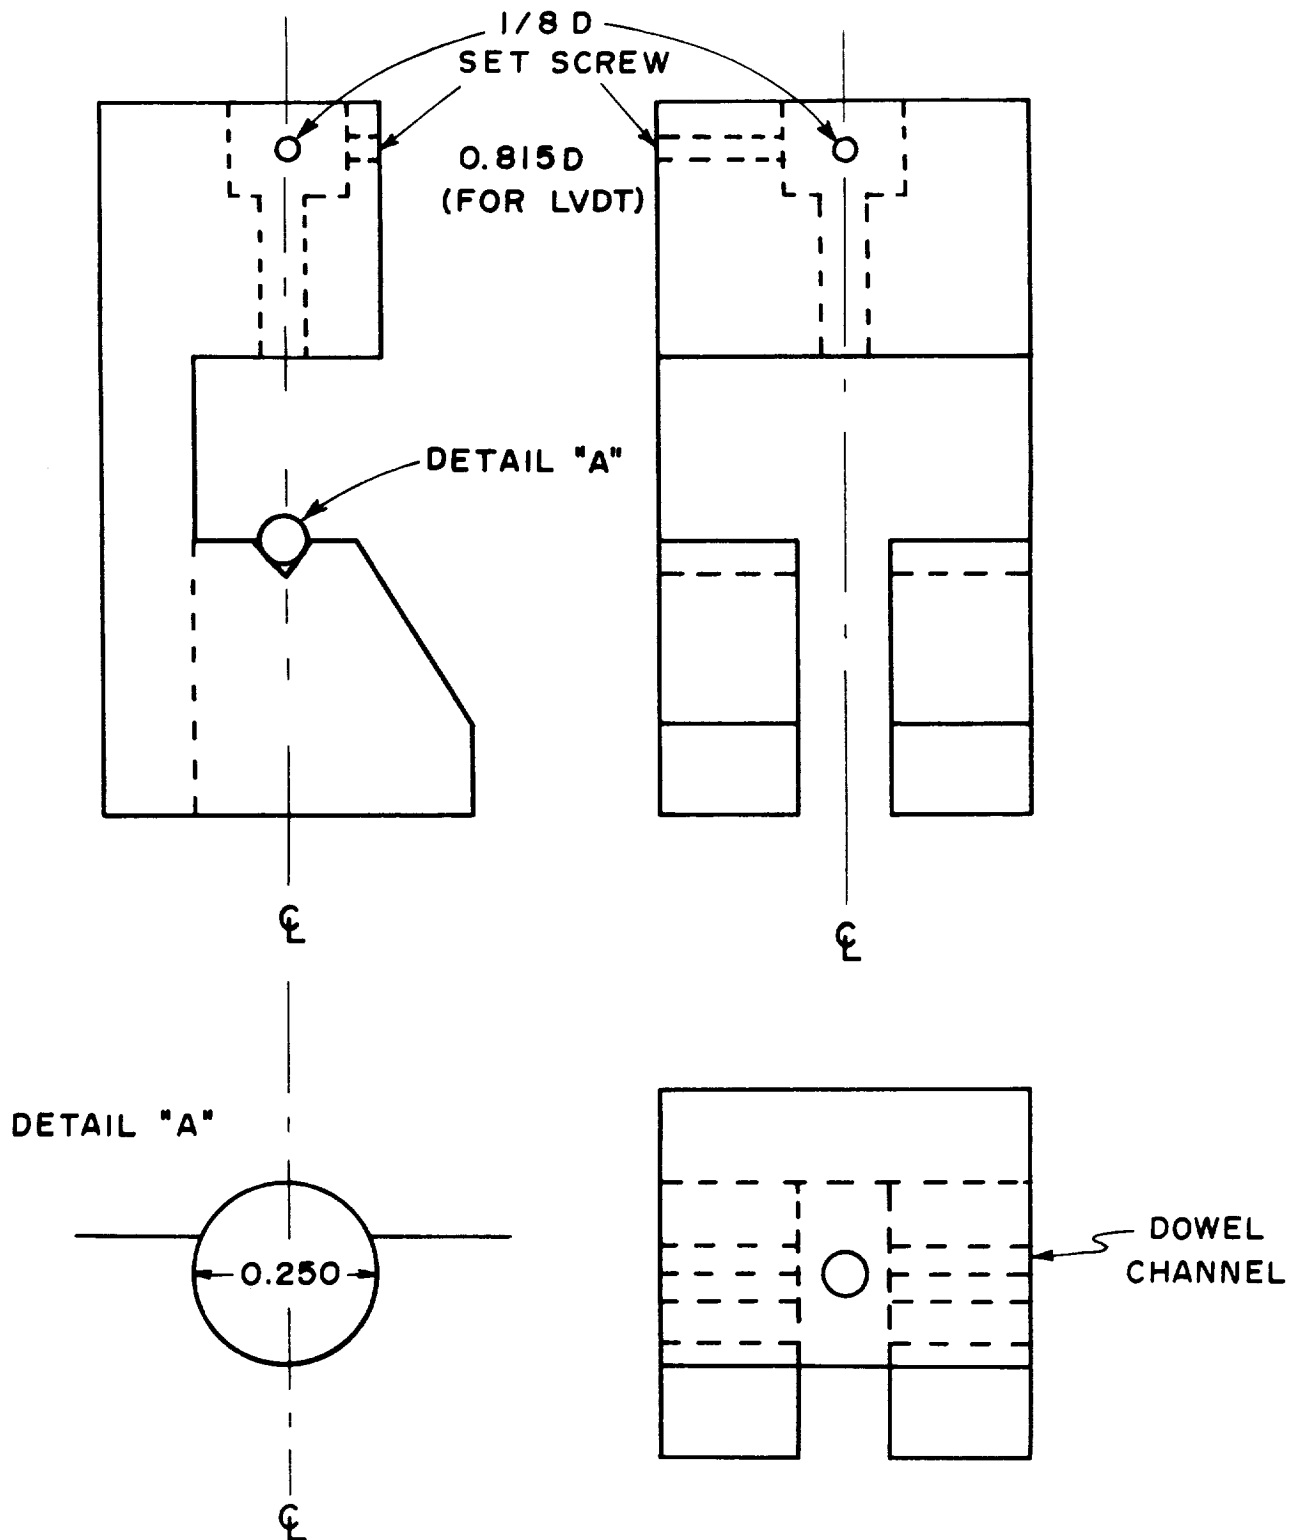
Point loading adhesive testing fixture (1/1 scale).
